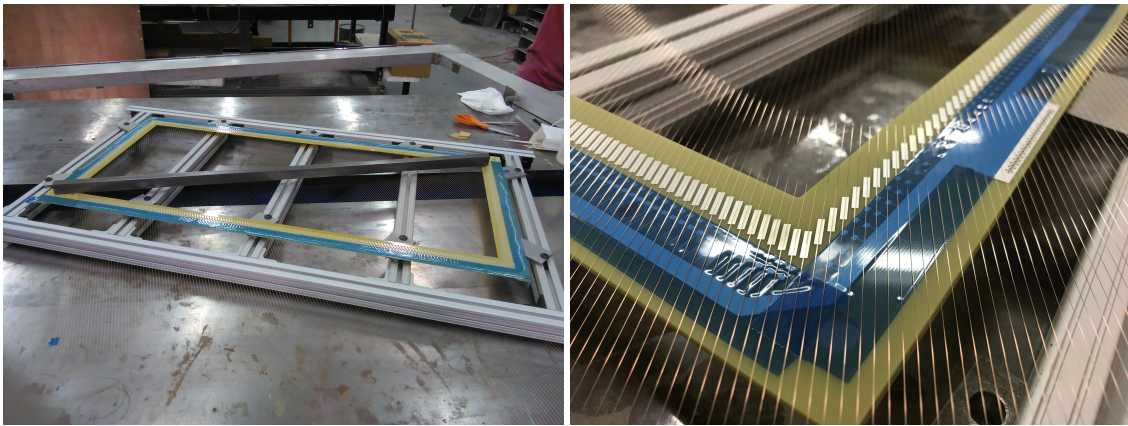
Left:* One of the wire planes during transfer, with the wires not yet cut from the winding frame. A steel bar, anchored along the diagonal, ensured that all wires made good contact with the board. *Right:* Close up view of wires aligned with solder pads prior to attachment with epoxy and solder.
